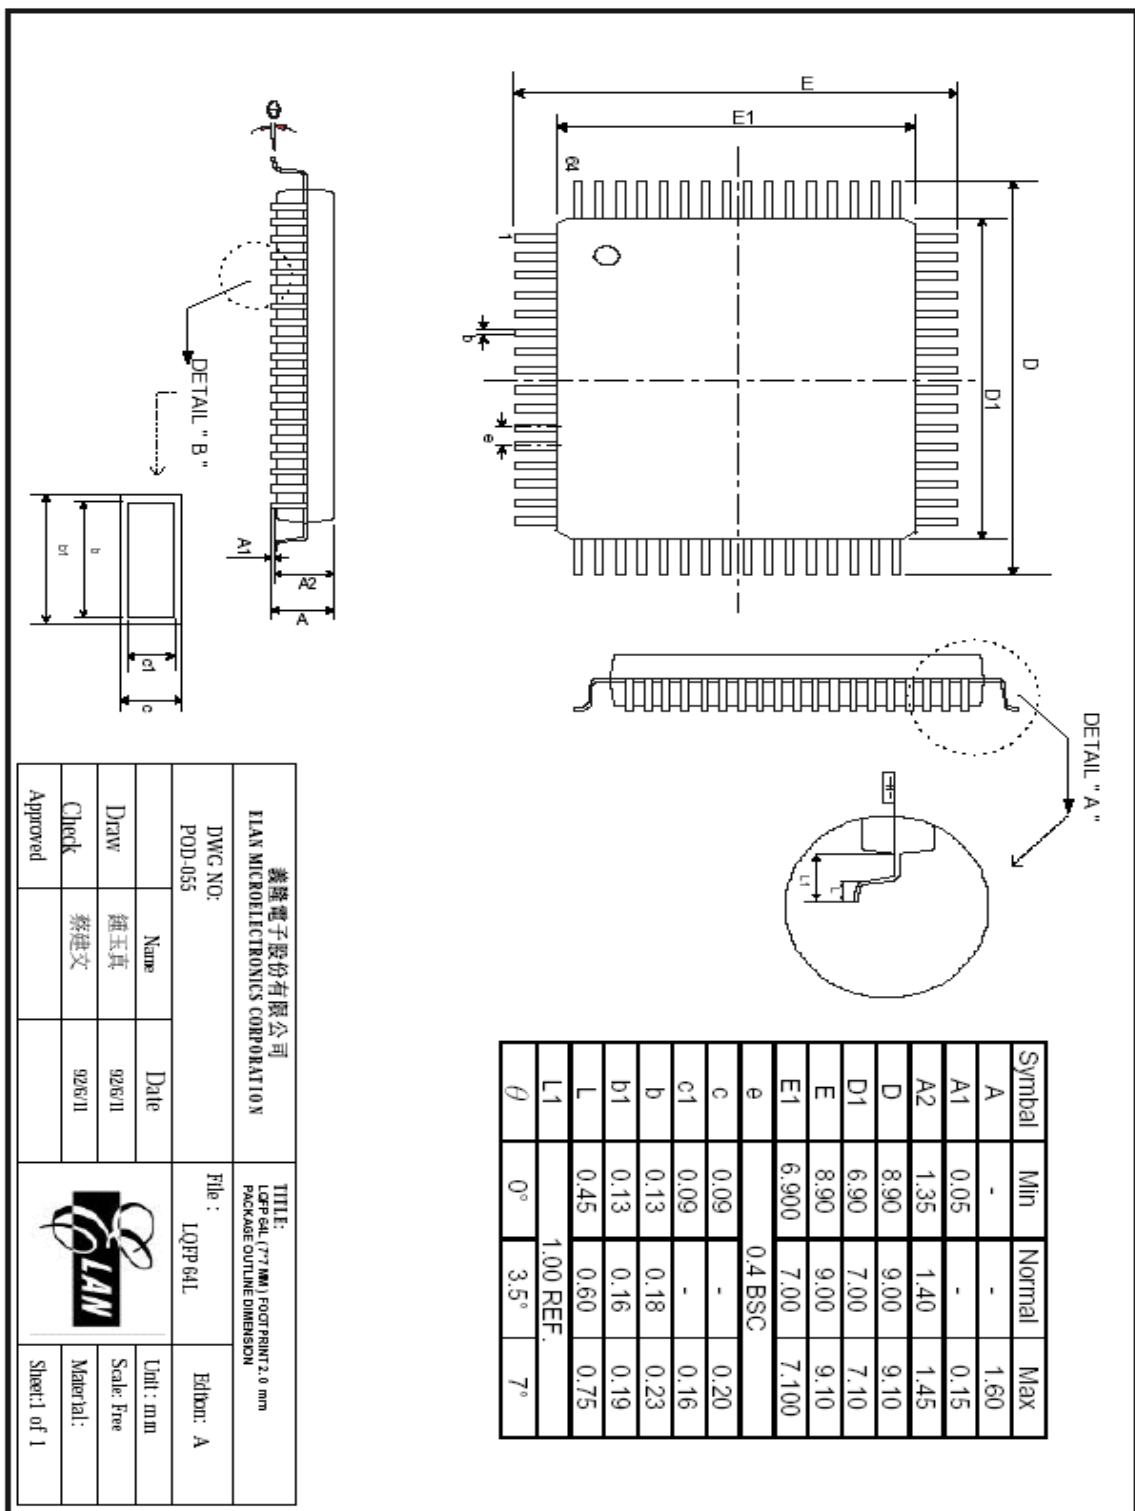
ePG3231 Package LQFP 64 pin Outline Dimension
